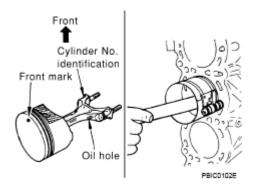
Identifying Piston And Connecting Rod Courtesy of NISSAN MOTOR CO., U.S.A.
